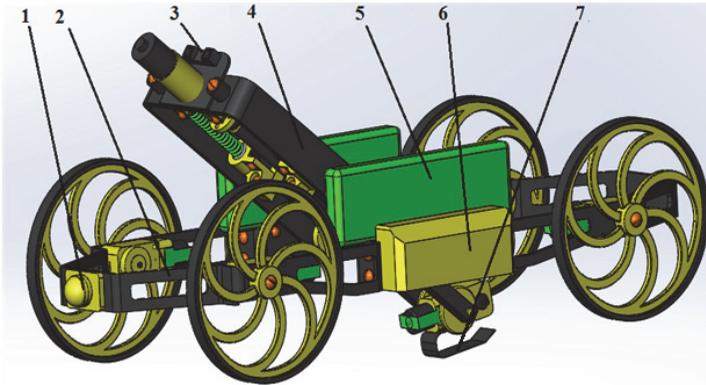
Wheeled jumping robot: 1 – camera, 2 – power frame, 3 – Infrared rangefinder, 4 – jumping mechanism, 5 – batteries, 6 – control system, 7 – jumping mechanism support
